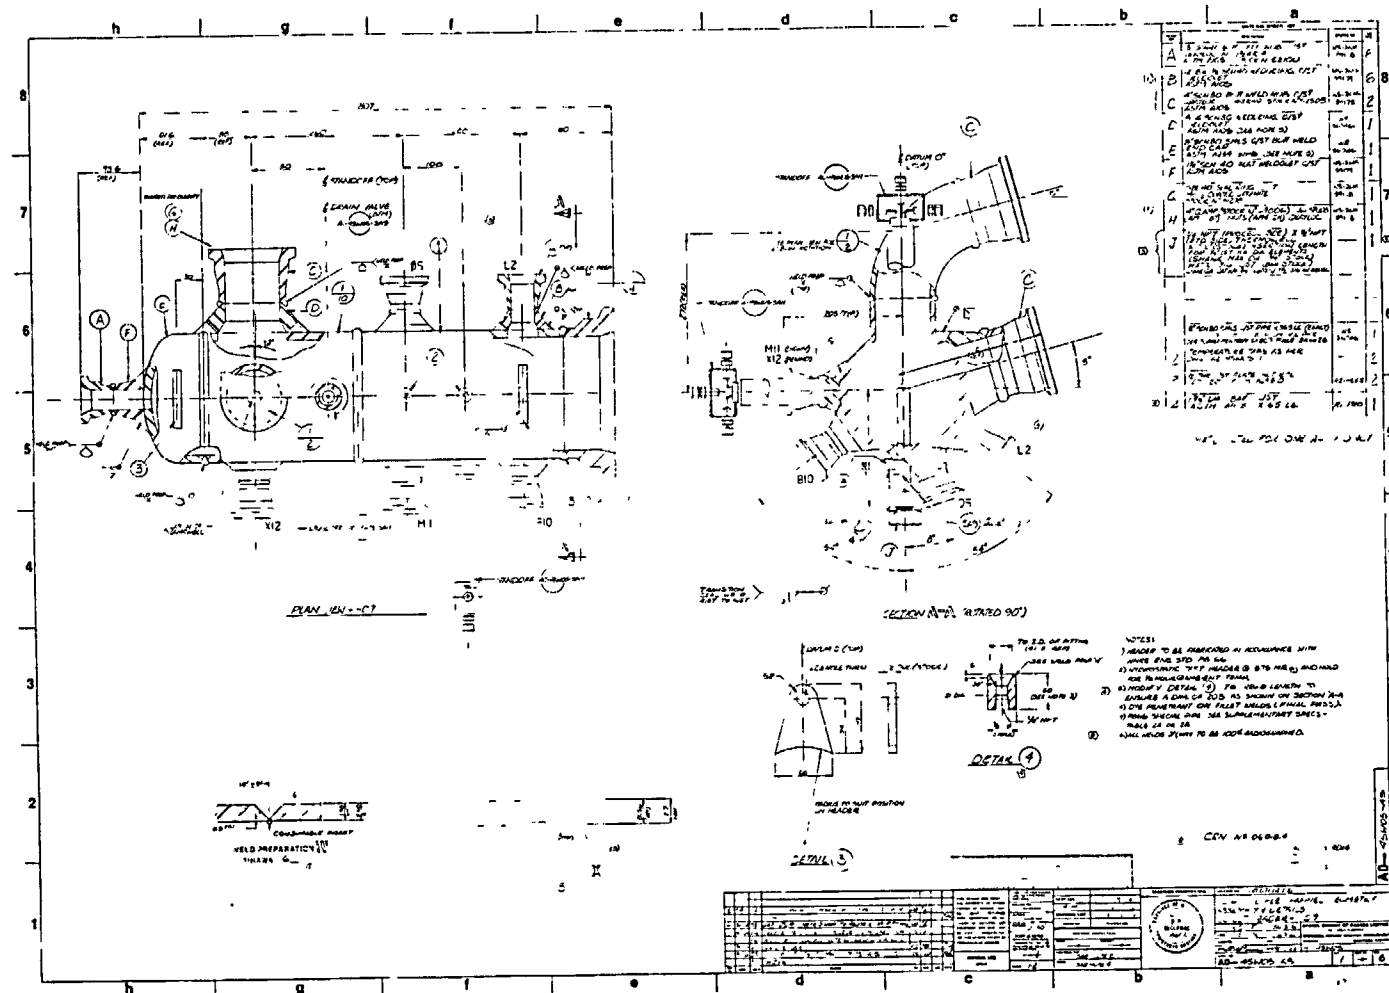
RD-14M Channel Geometry Assembly and Details: Inlet Header HDR5 (Drawing A0-45W05-A1)
